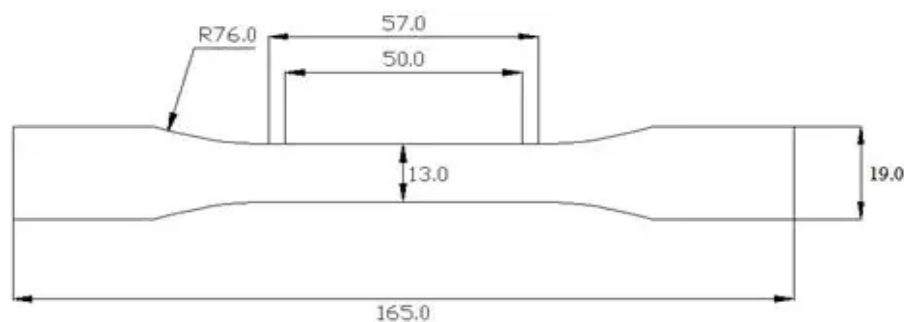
Dimensions of ASTM D638 Type 1 Tensile Test Specimen
